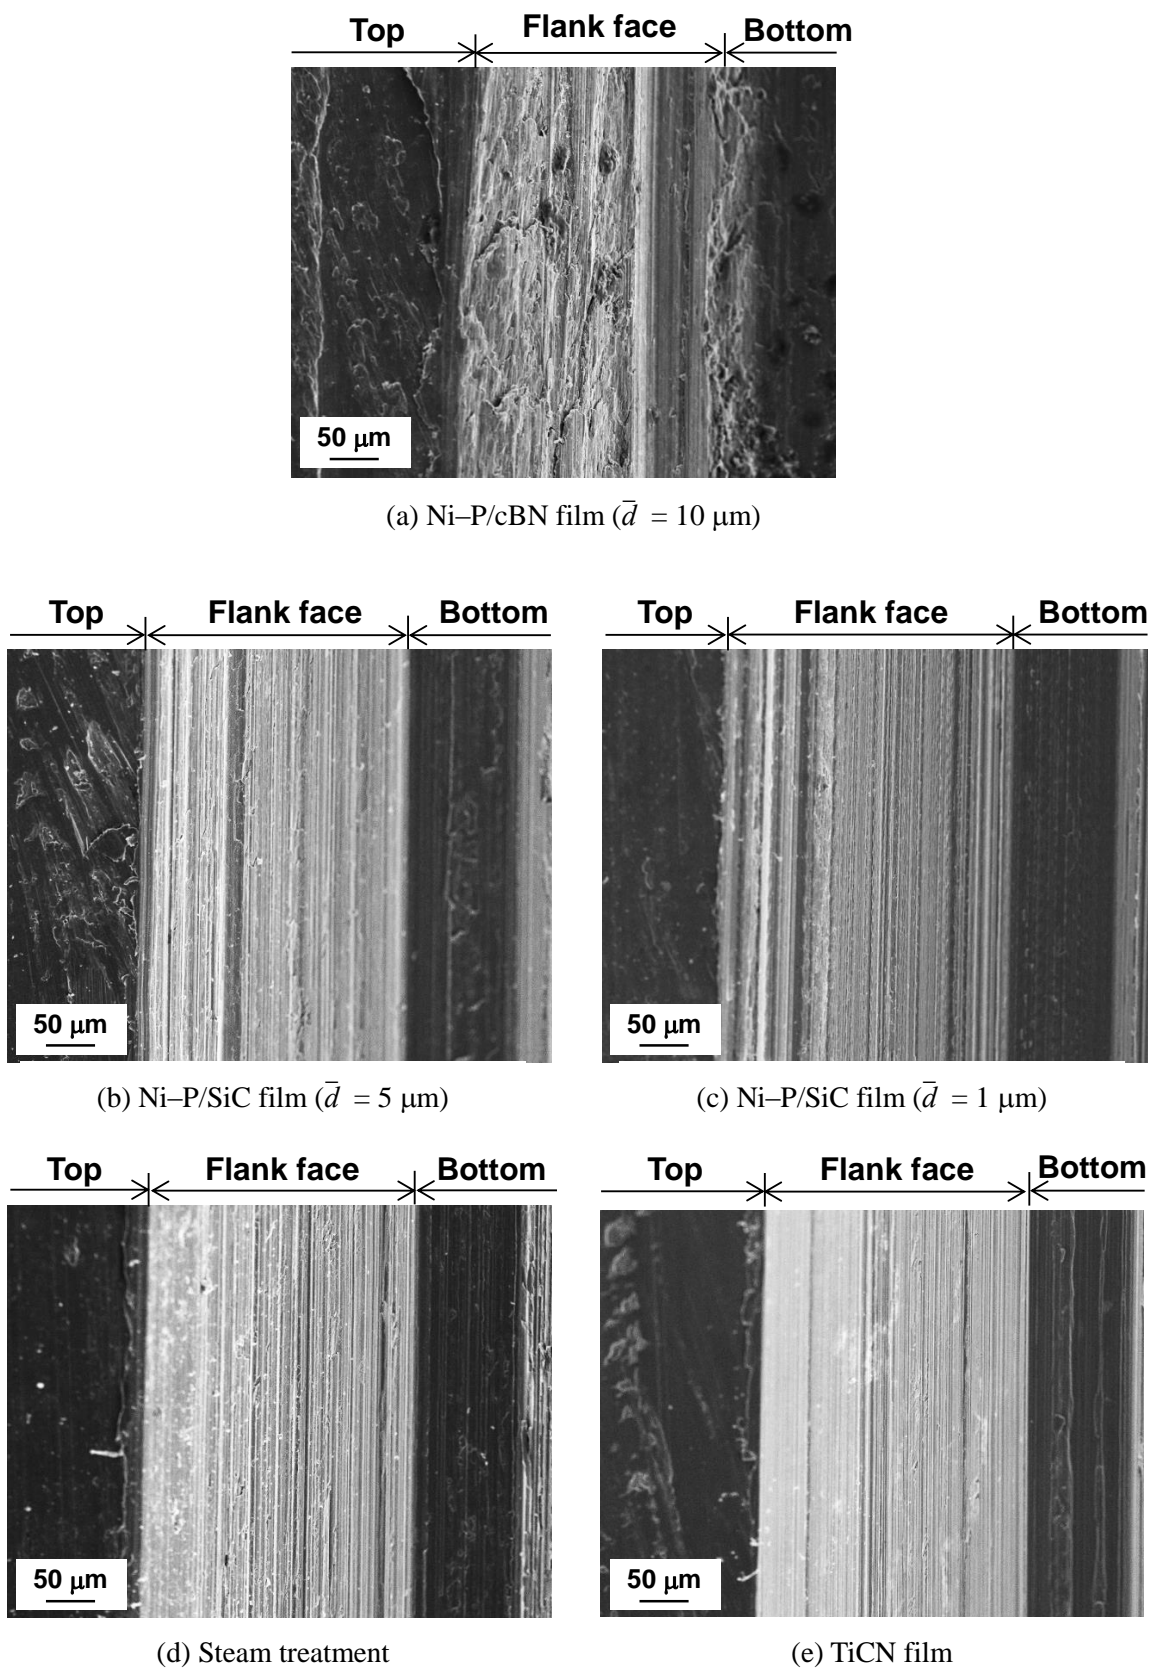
SEM images of flank face of thread hole ($V_r = 50 \text{ m/min}$)
